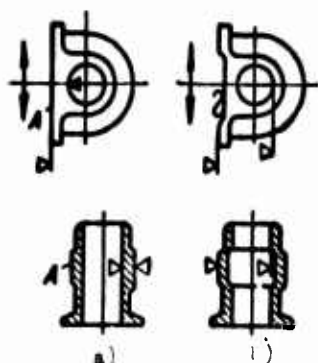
Cast constructions: a) bilateral machining in the danger zone; b) one-sided treatment.
